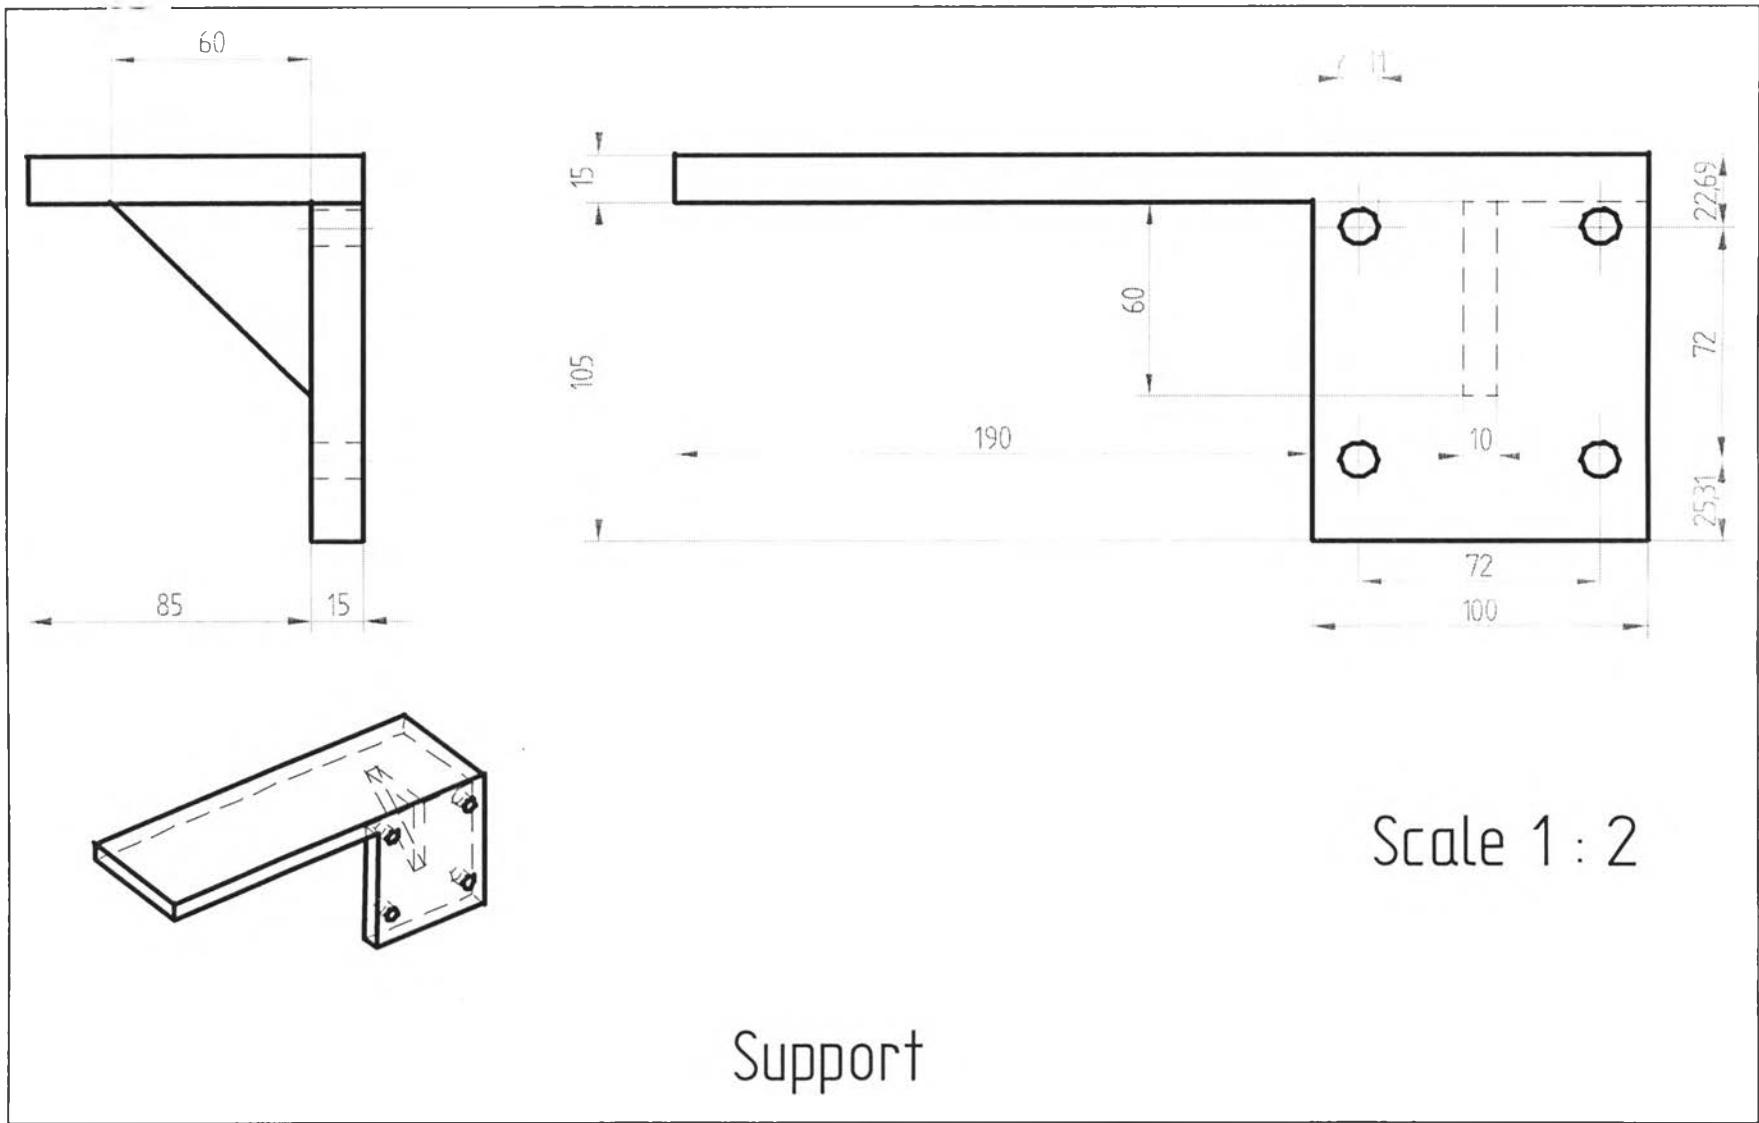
Drawing of Pneumatic Cylinder Support (Tender Side)
